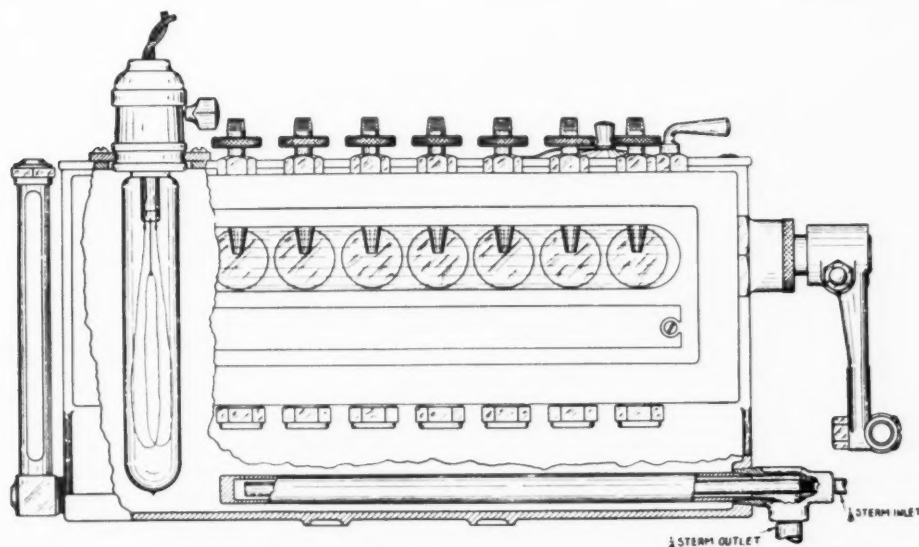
Section of a Bowser automatic force-feed lubricator showing steam coils in the oil reservoir for preheating purposes.
